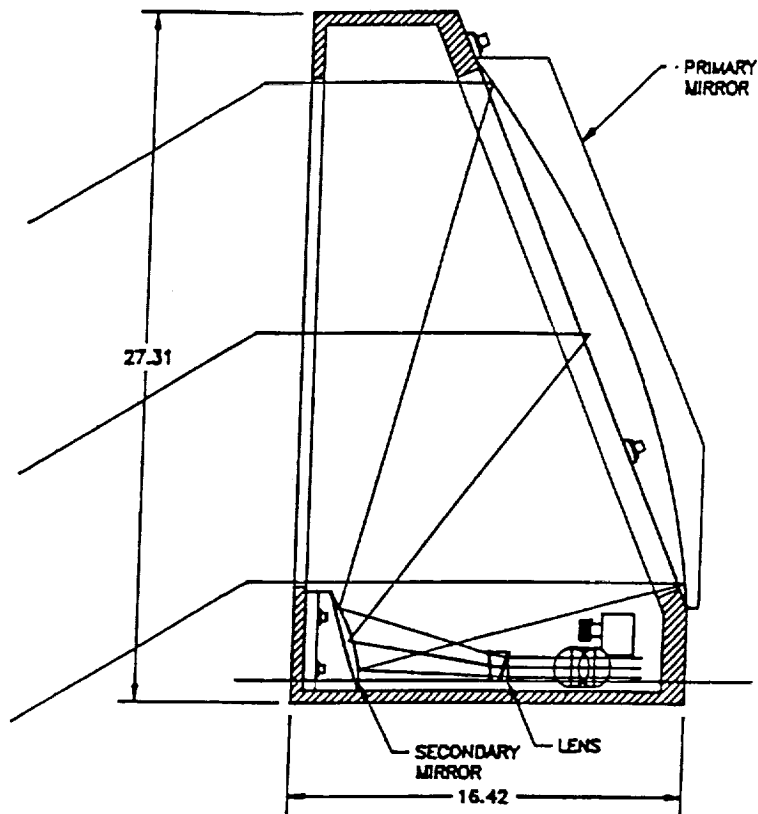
Telescope assembly showing the mirrors, lens and the support structure.
